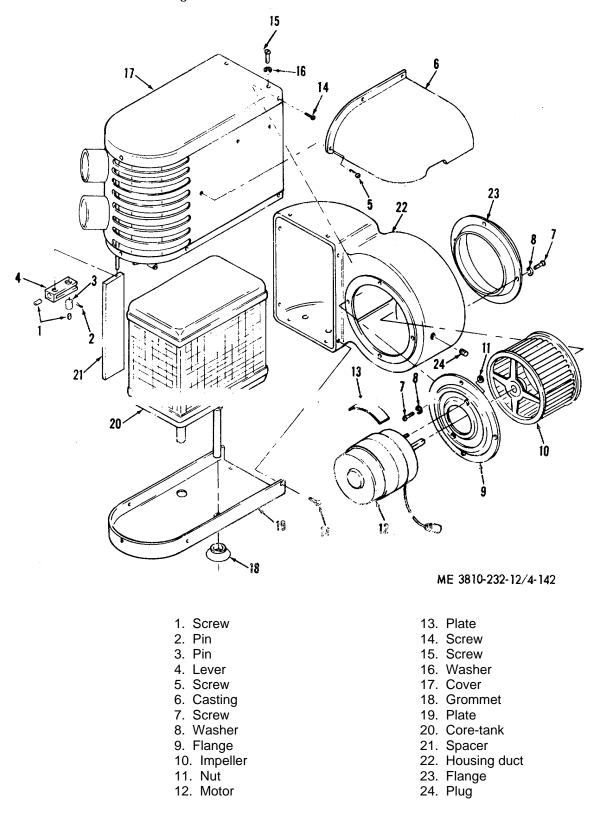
Carrier cab heater, disassembly and reassembly.
